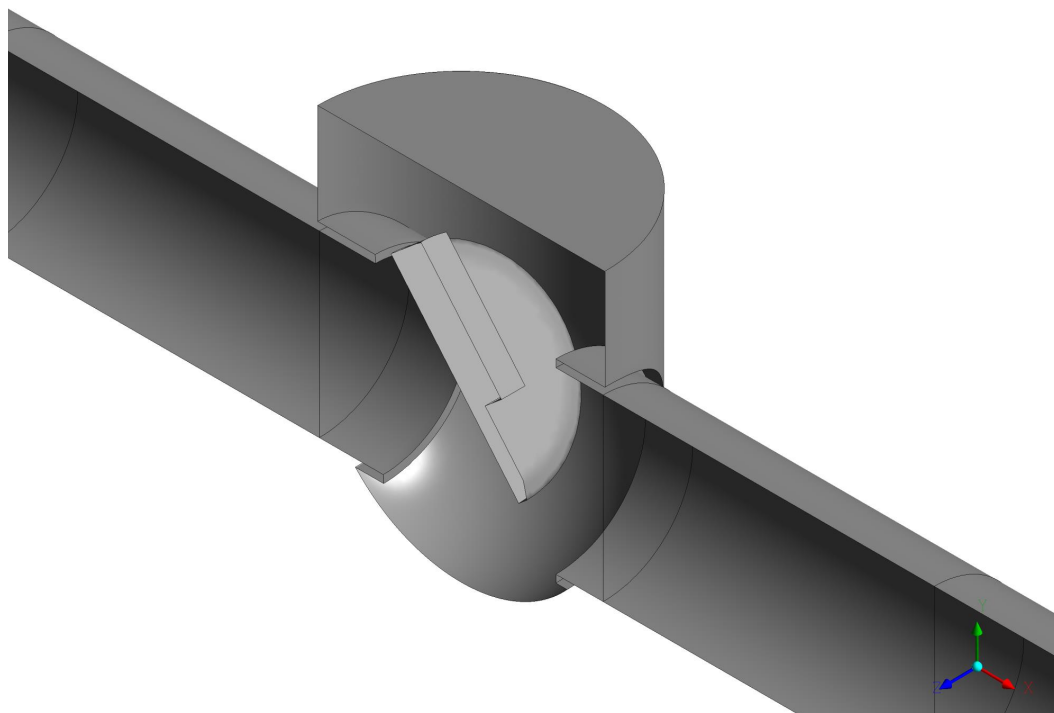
Three-dimensional overview of the valve model. The symmetry plane has been removed for a clear view inside the valve.
